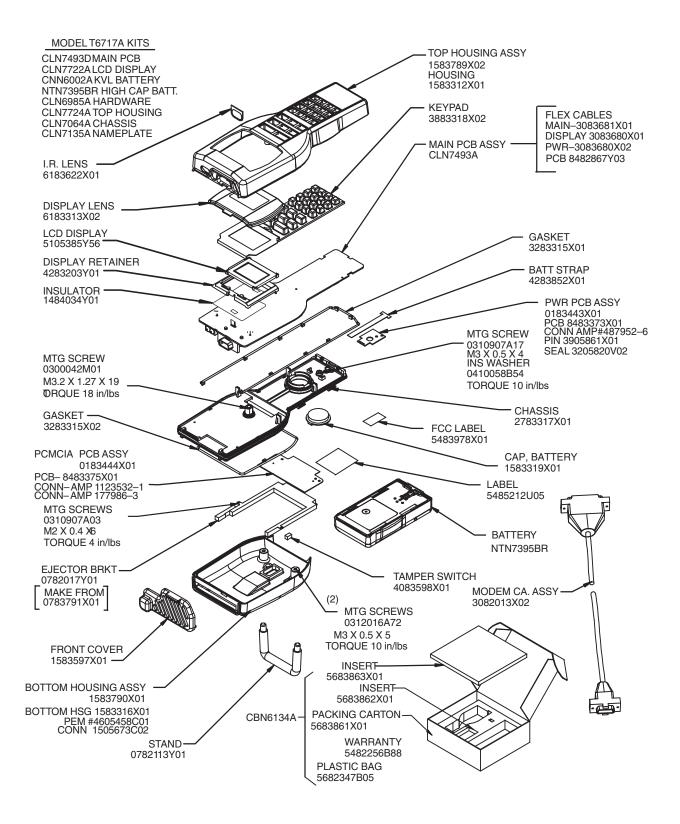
KVL 3000 PLUS EXPLODED VIEW
